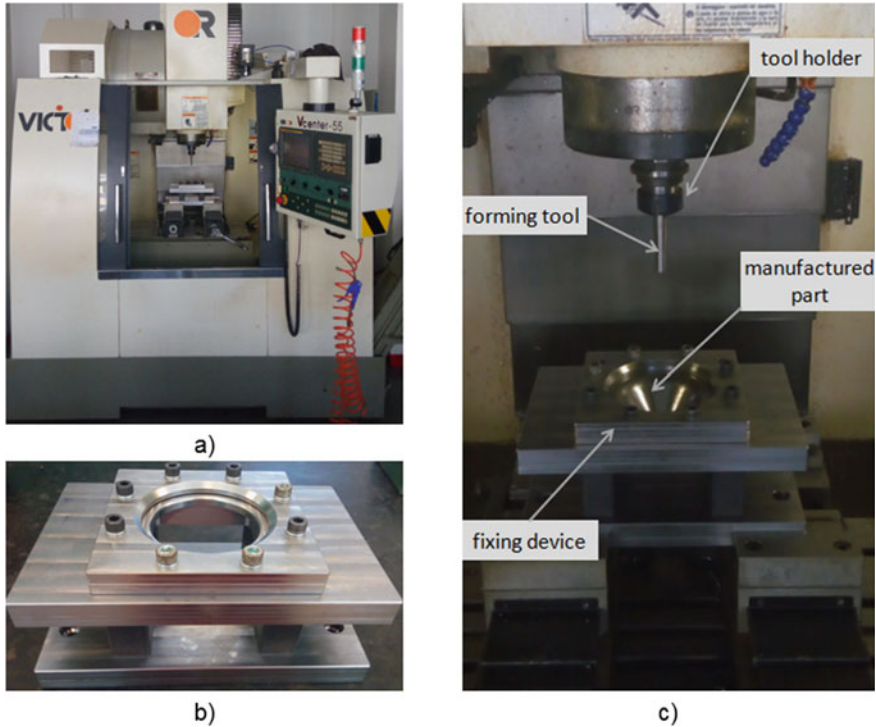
SPIF technological setup: a CNC milling machine, b blank fixing device, c setup implementation [5, 7, 23]
